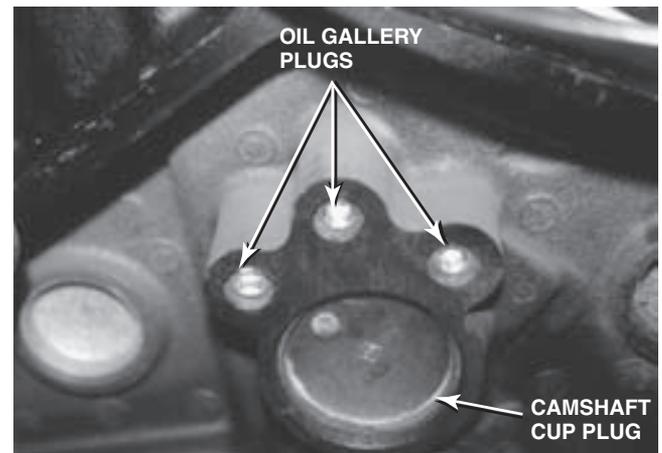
Typical oil gallery plugs on the rear of a Chevrolet small-block V-8 engine.
